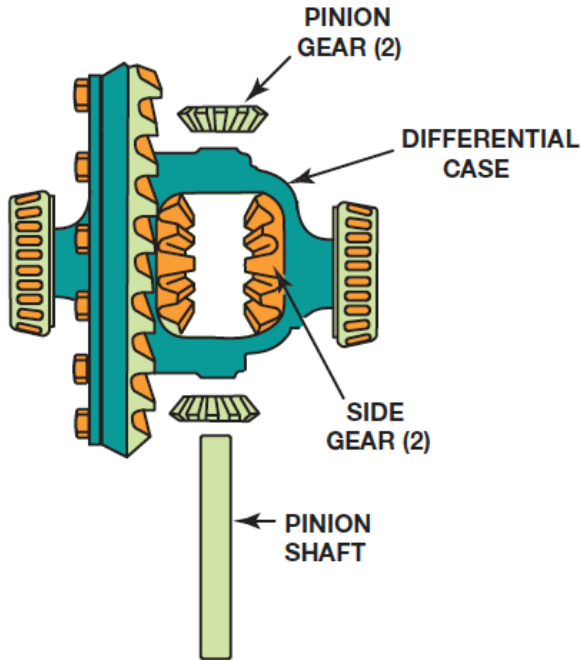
With the pinion shaft removed, the pinion gears can be rolled to the case windows and removed; then the side gears can be lifted out of the case.
